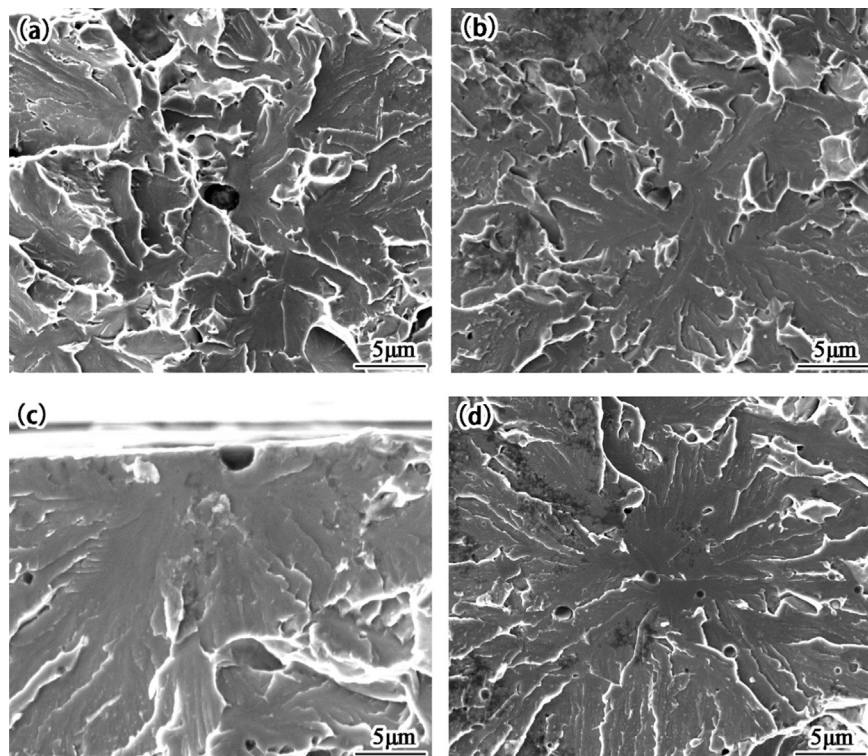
Fracture surfaces of Charpy V specimens with various weld metal fractured at -196 °C. (a) 1#, (b) 2#, (c) 3#, (d) 4#.
